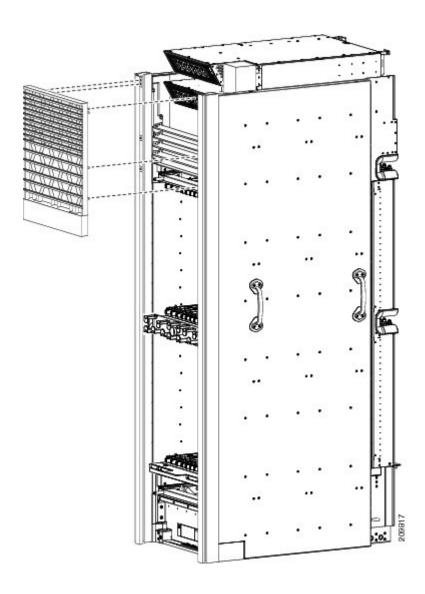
Removing the Rear (MSC) Side Exterior Doors
